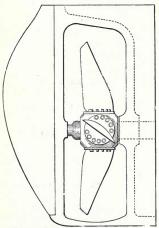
Screw-propeller with blades bolted to the Boss.
